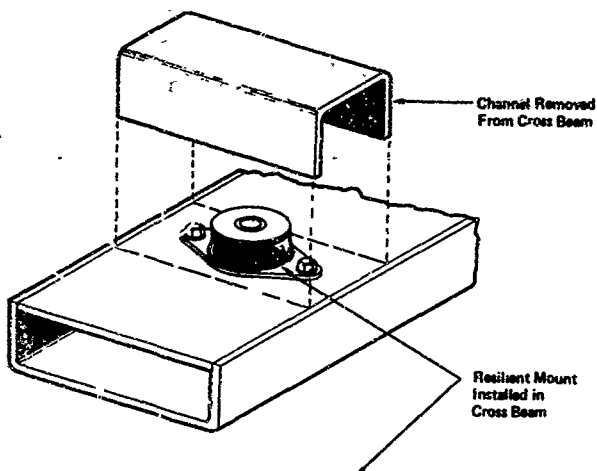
MODIFIED REAR ENGINE/GENERATOR MOUNTS.
